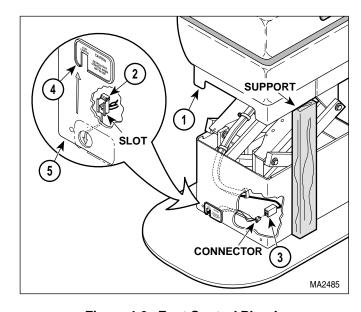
Foot Control Plug-In Port Removal / Installation
